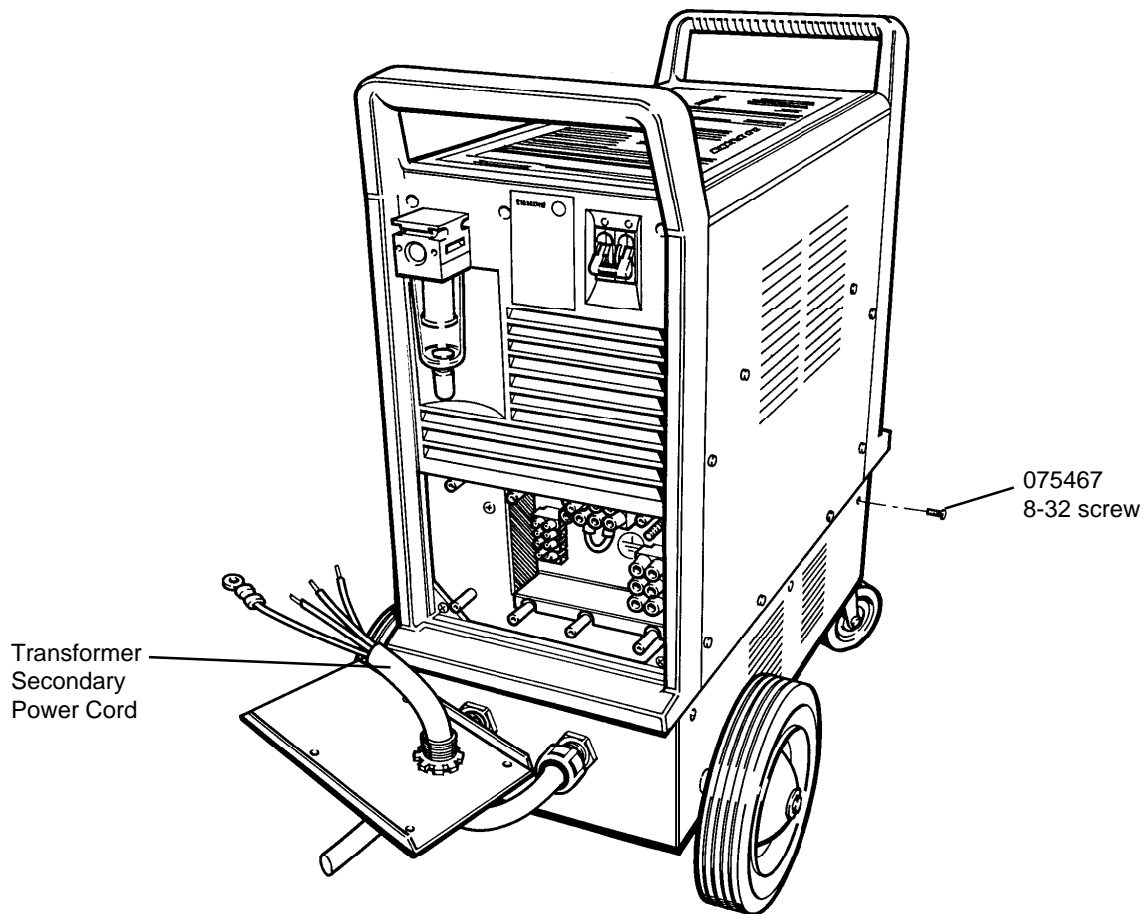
Attaching 600V Transformer Case Assembly to Powermax900 Chassis
